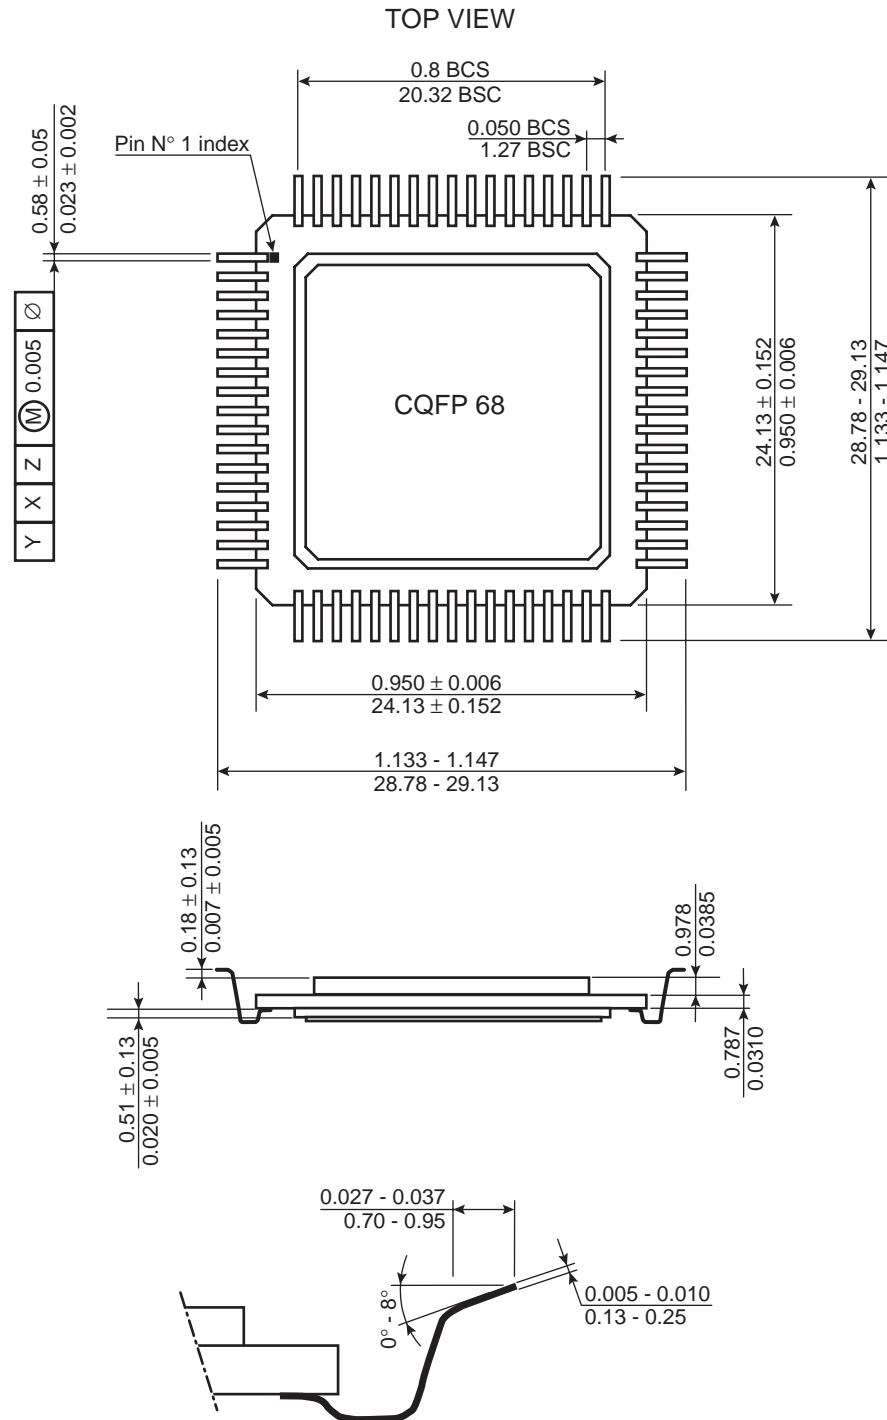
Package Dimension – 68-lead Enhanced CQFP with Heatspreder
